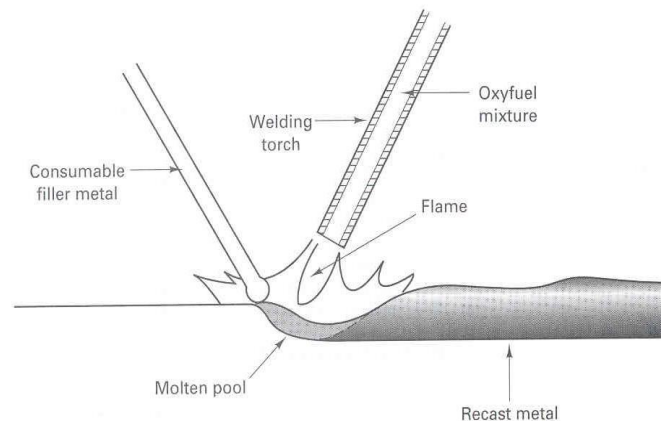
Schematic of oxyfuel gas welding with a consumable welding rod.
